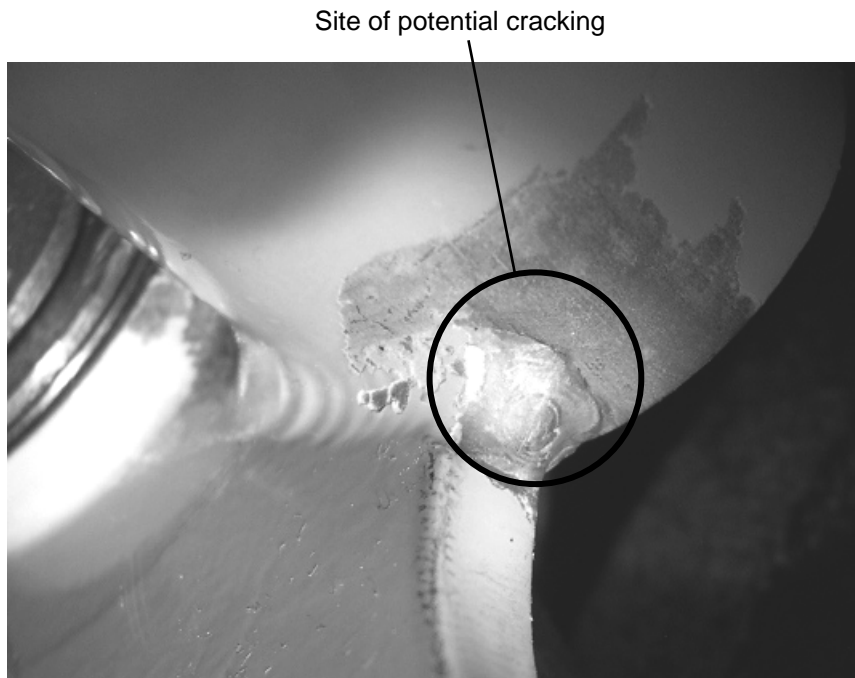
RUDDER PEDAL WELD ASSEMBLY
